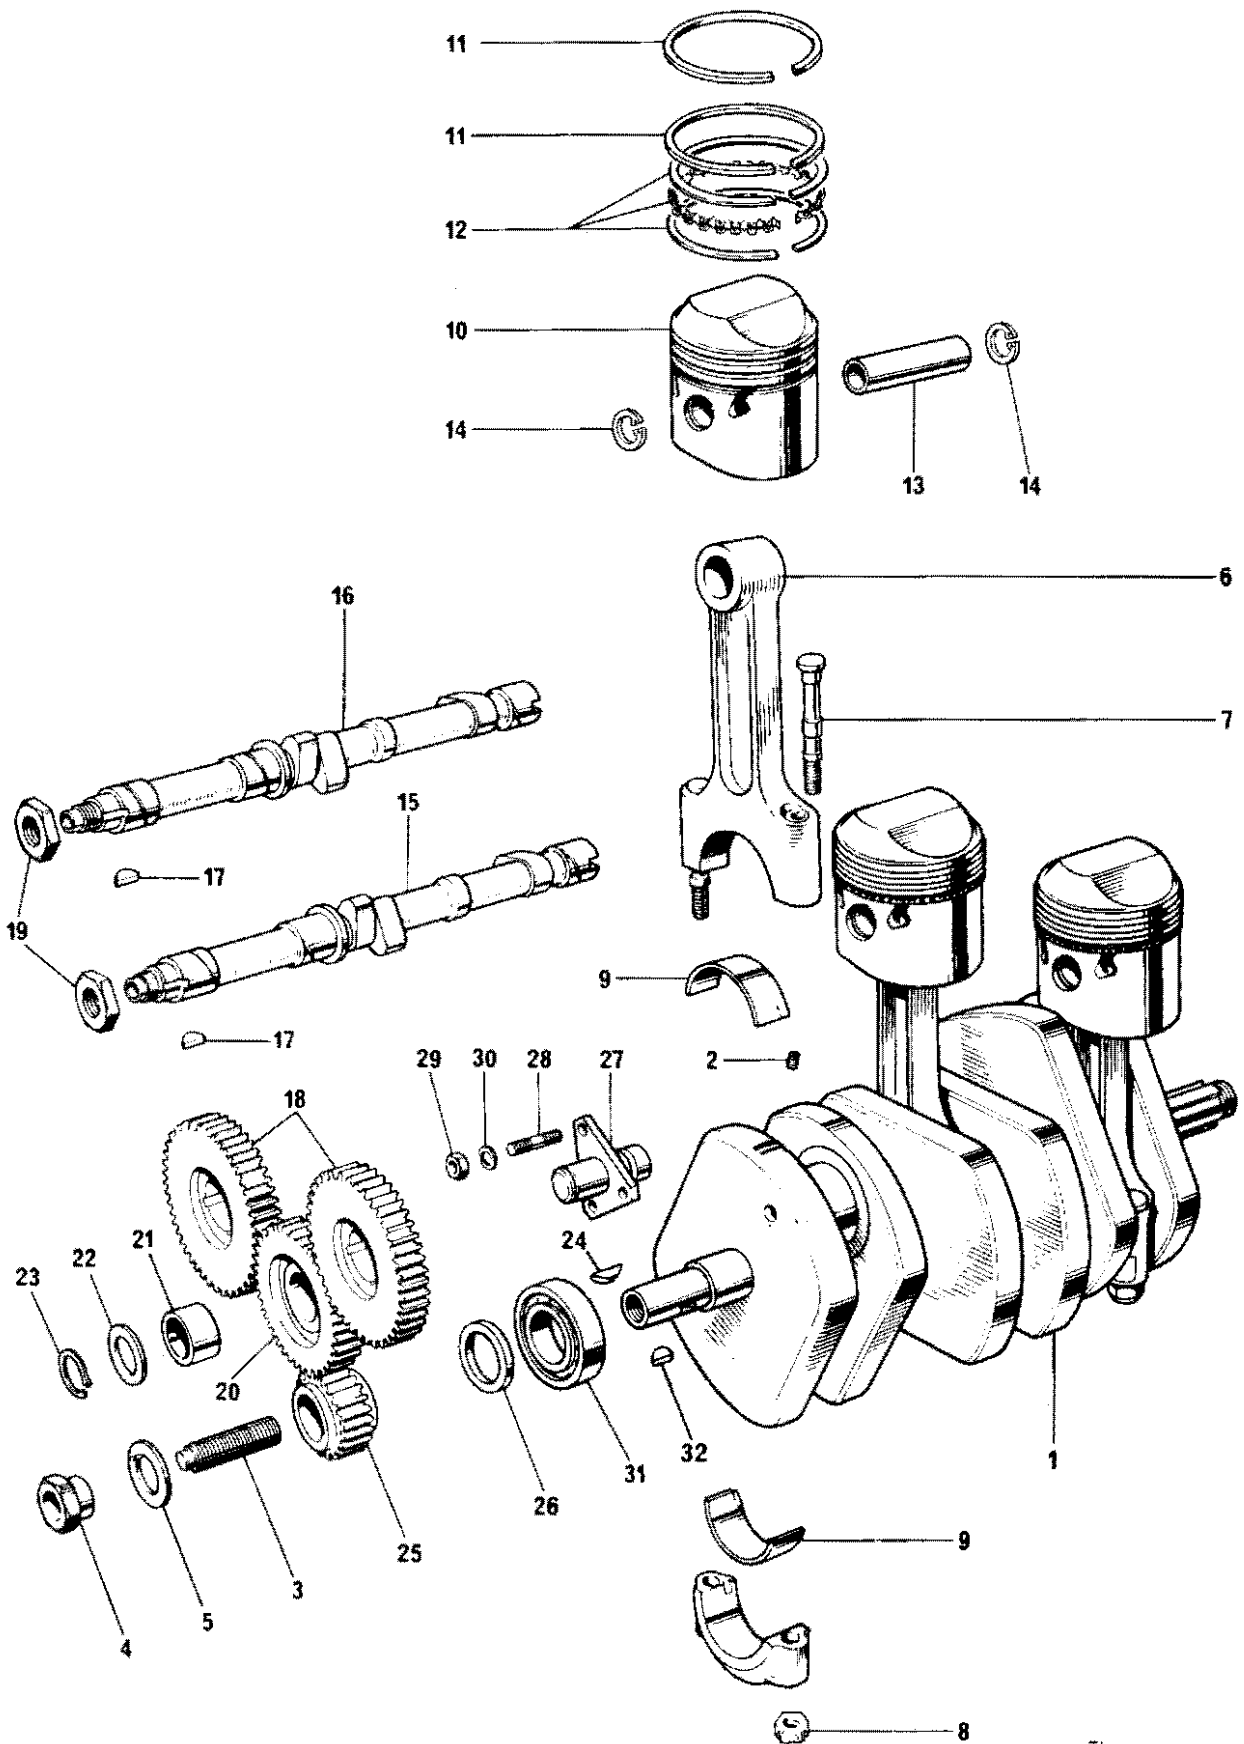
CRANKSHAFT AND CONNECTING RODS
